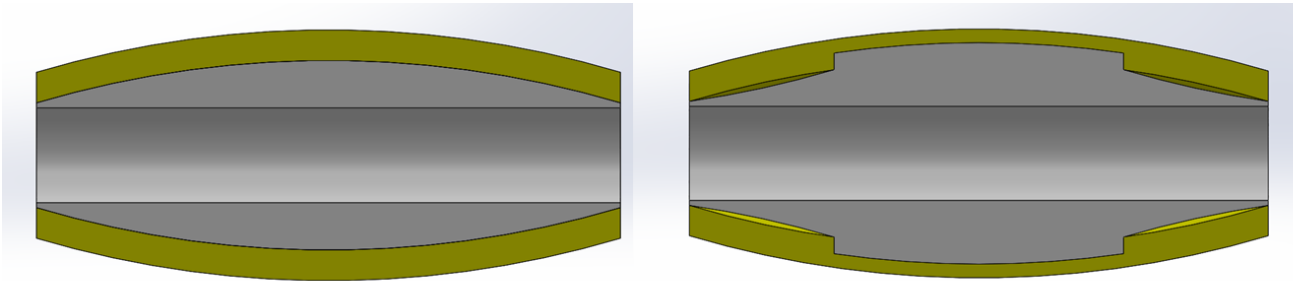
Cross-sectional designs of the Mecanum Wheel roller before (left) and after modification (right).
